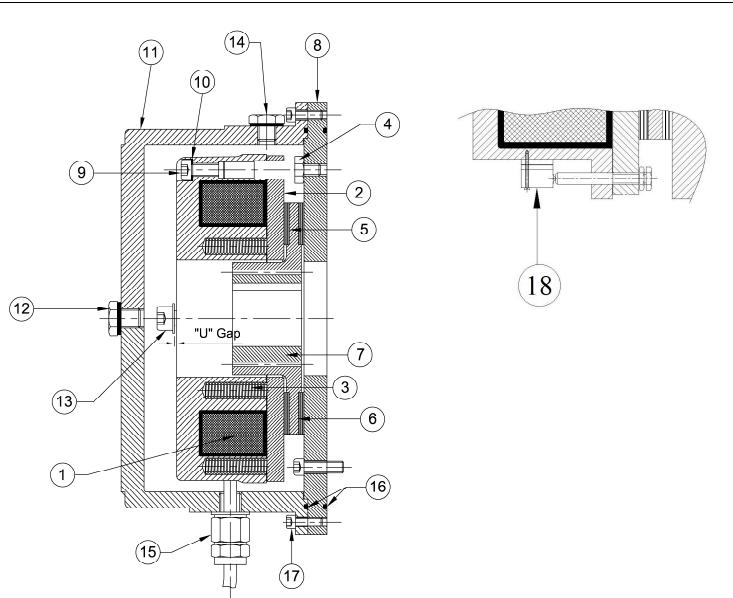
Design of a Spring Applied Brake Type: WP.458 (without Hand Release)
